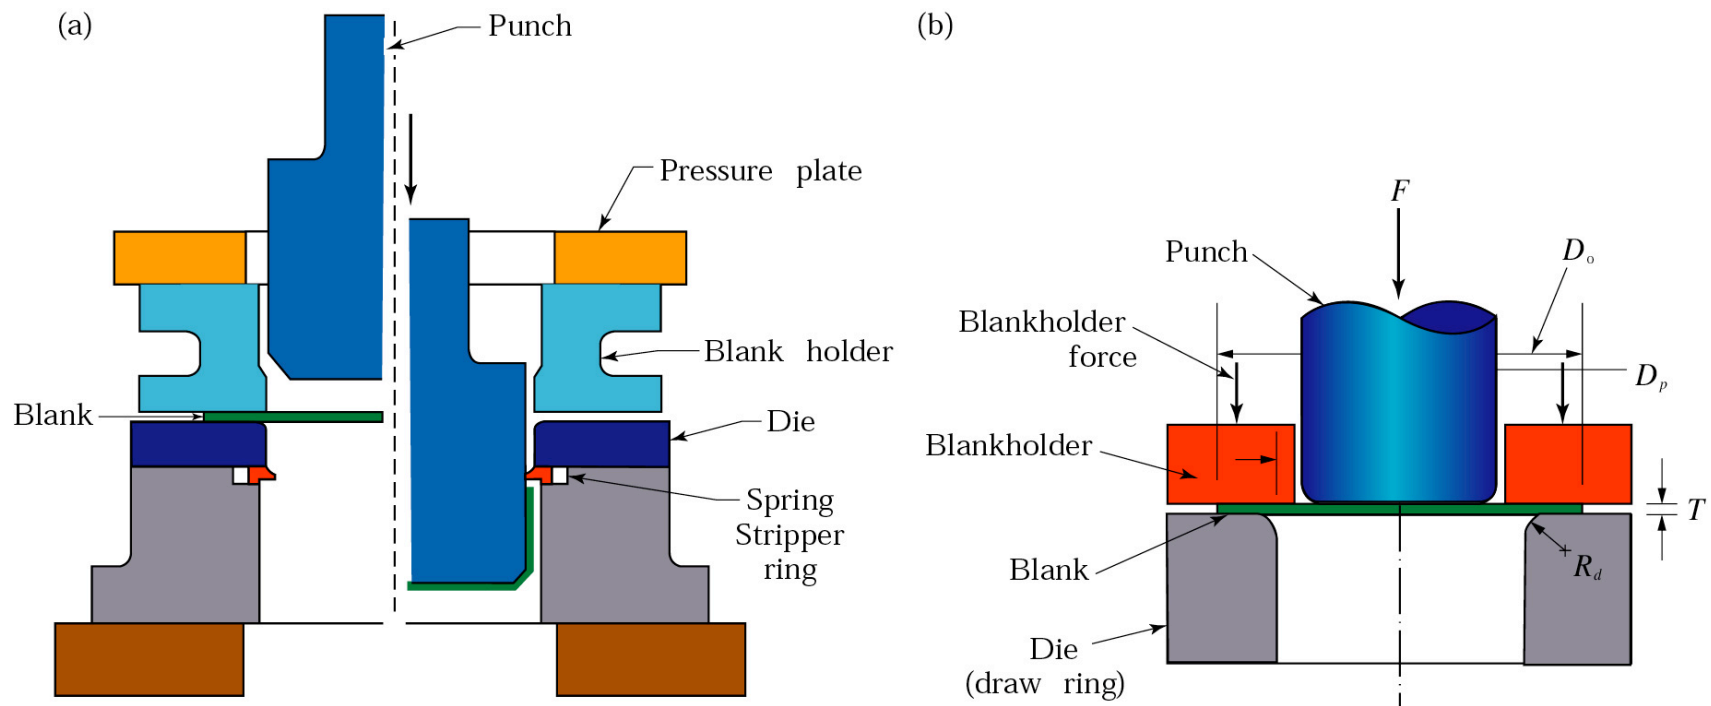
(a) Schematic illustration of the deep-drawing process on a circular sheet-metal blank. The stripper ring facilitates the removal of the formed cup from the punch. (b) Process variables in deep drawing. Except for the punch force, F , all the parameters indicated in the figure are independent variables.
